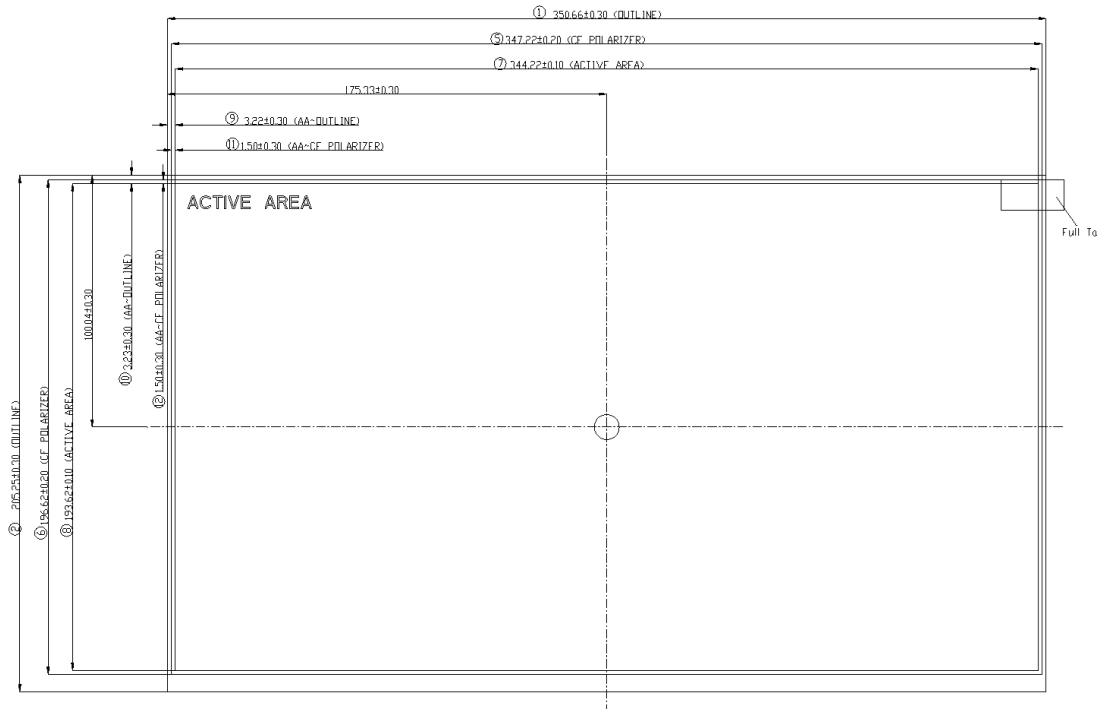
TFT-LCD Module Outline Dimension (Front View)
